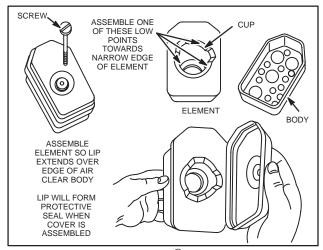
OIL-FOAM[®] AIR CLEANER, HORIZONTAL AND VERTICAL CRANKSHAFT
